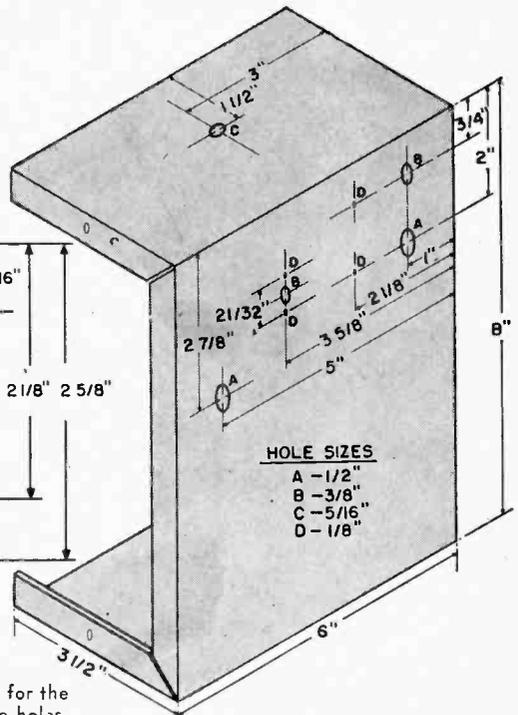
Cover of the "Minibox" used for the transmitter showing the position of the holes.
